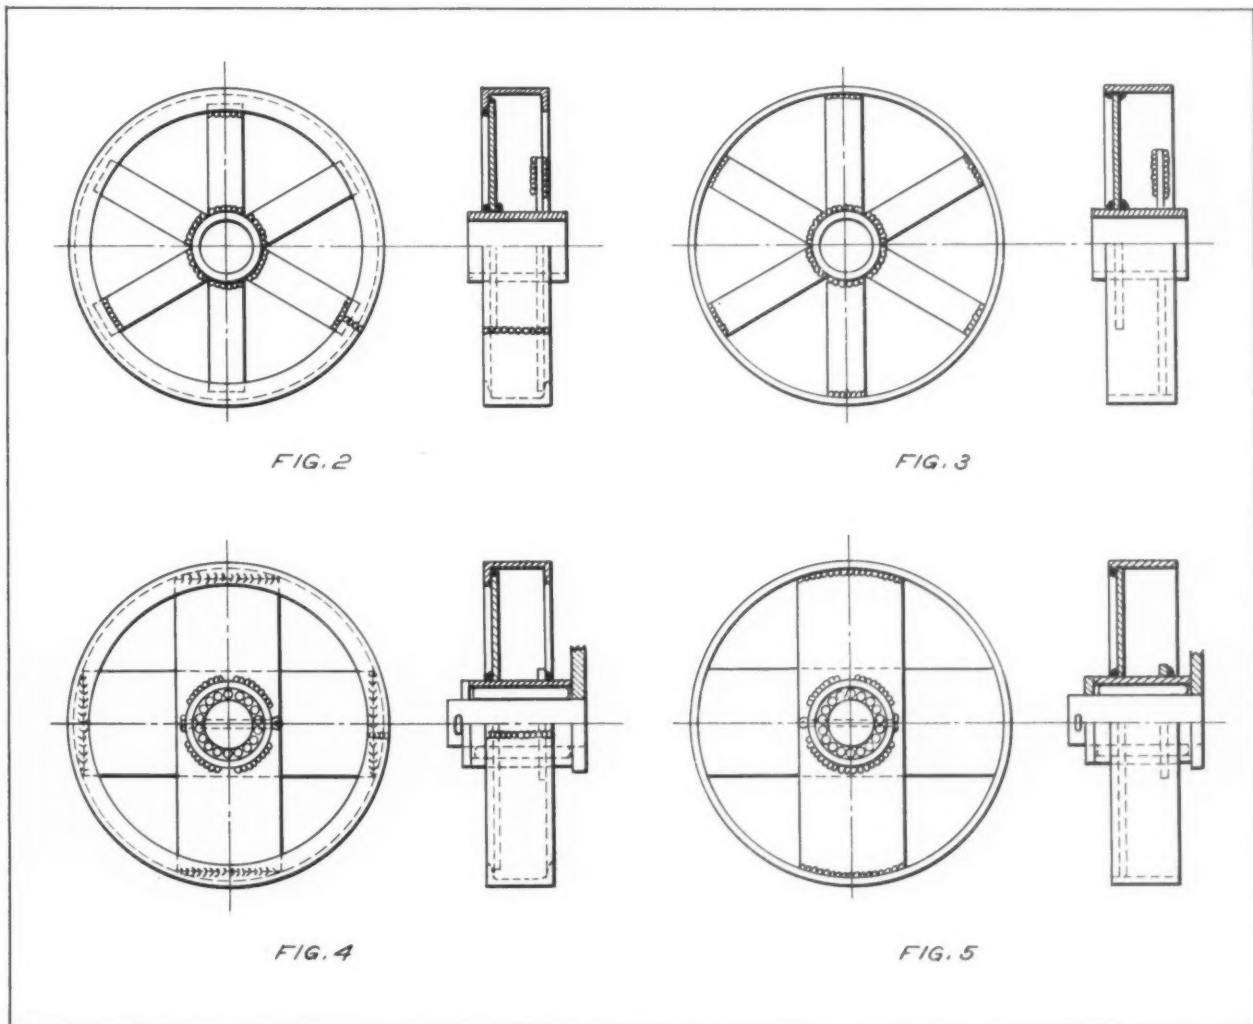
Arc-welded Wheel with Axle, Rim, and Spokes Fabricated from Pipe, Rolled Channel, and Bar Stock, Respectively. Fig. 3. Wheel of Same Construction as Shown in Fig. 2, Except that Rim is Section of Large-diameter Pipe. Fig. 4. Arc-welded Wheel of Simplified Design with Rolled Channel Rim. Note Roller Bearing. Fig. 5. Wheel Like One Shown in Fig. 4, Except that Rim is Made of Pipe
